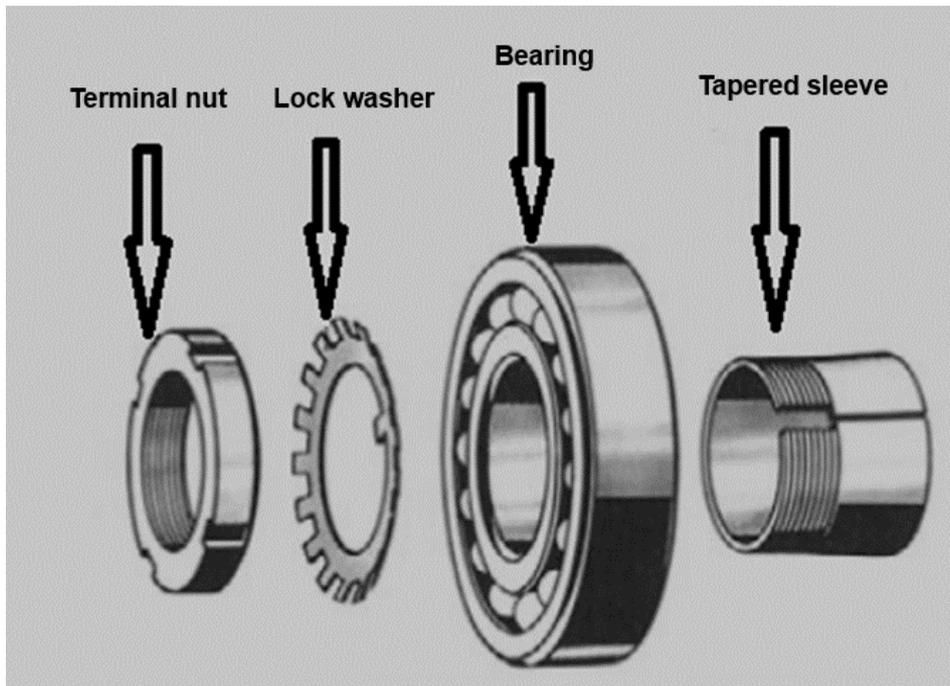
Mounting a bearing with a tapered hole using a tapered sleeve
